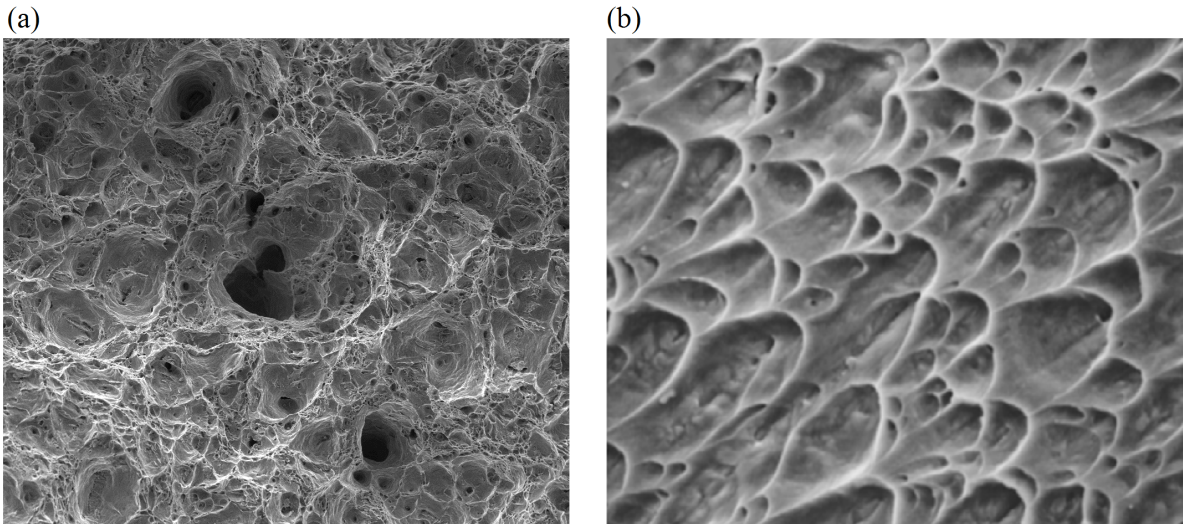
Typical fracture surfaces of metals failing in (a) tension, and (b) shear [12].
